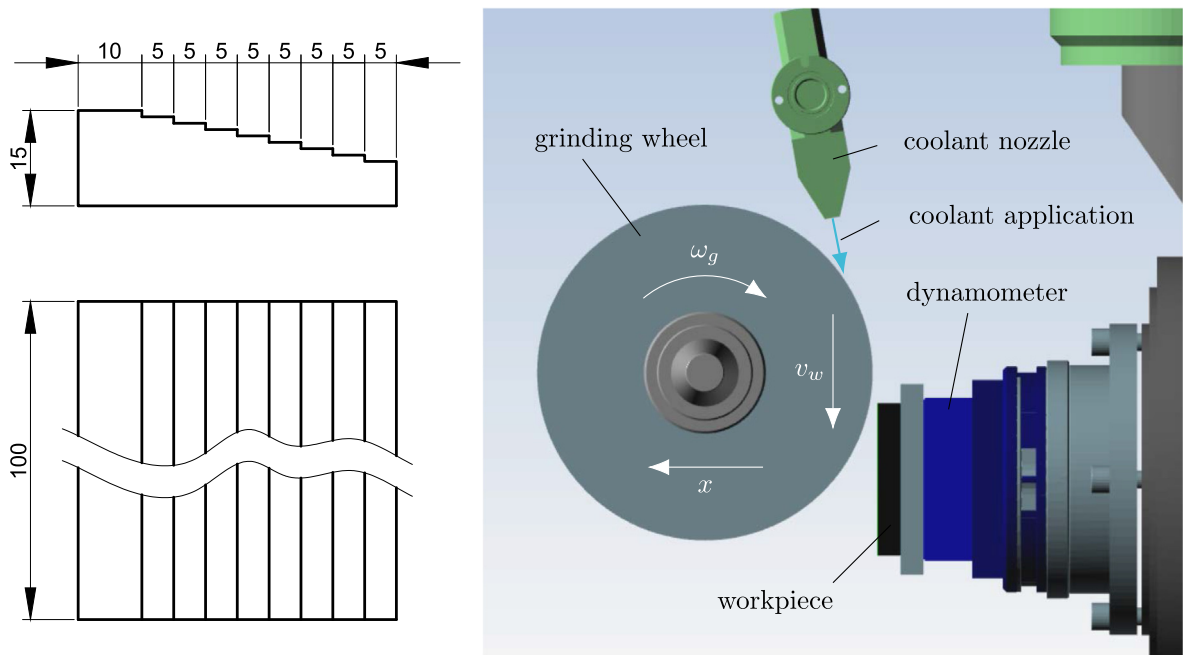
A schematic representation of the workpiece (left) and the experimental setup (right) in an up-grinding configuration, where the feed motion is performed by the grinding wheel.
